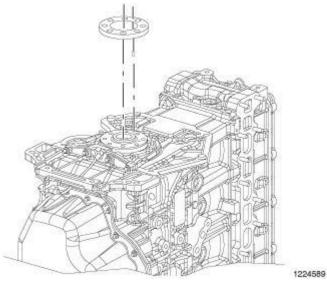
Crankshaft Sensor Tone Wheel Courtesy of CHRYSLER LLC
